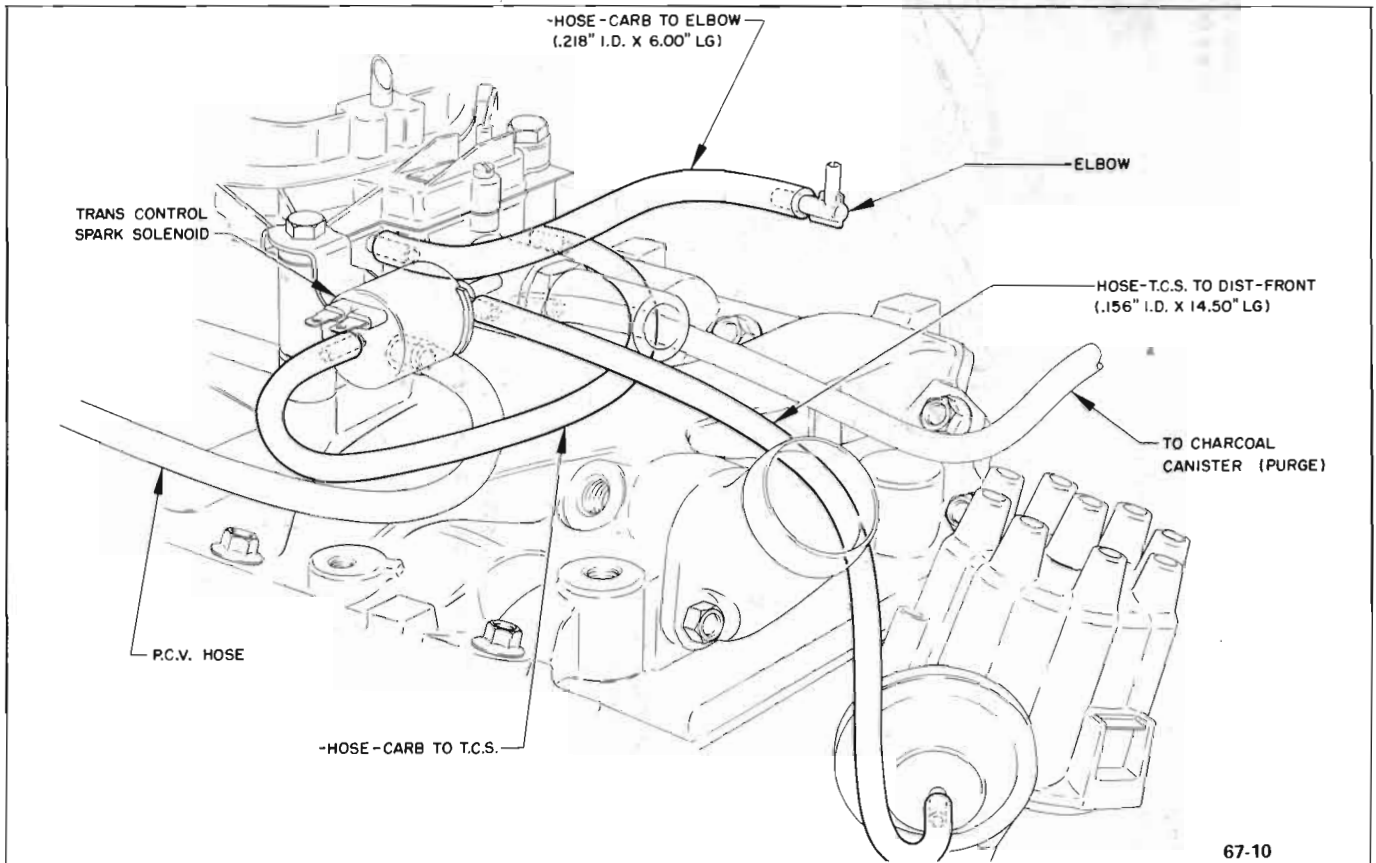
Vacuum Tube Routing - 350-4 Barrel 43-44-45000 Less A/C and/or Heavy Duty Cooling
